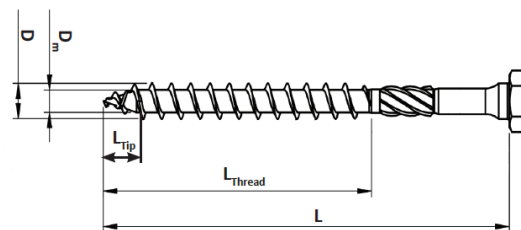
Drawing of an ASSY Kombi 3.0 screw
